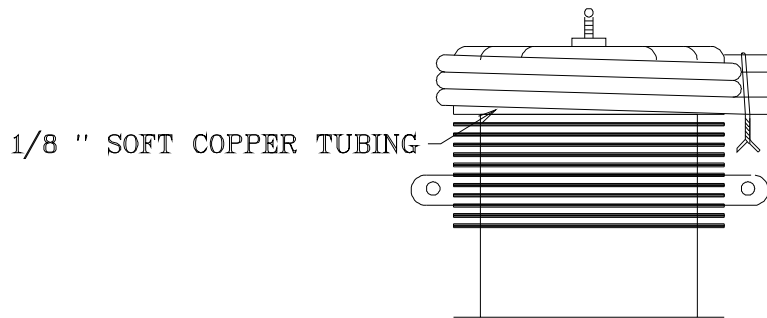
MAKING YOUR OWN HEAD COIL
